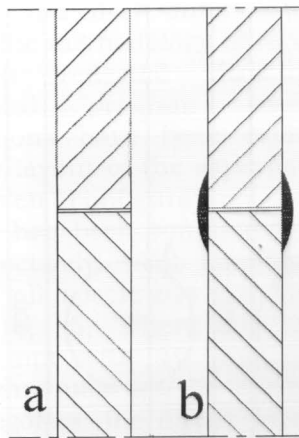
Repair steps for specimen S5; a) original crack without blunting nor grooving, and b) direct depositing of weld without grinding.
